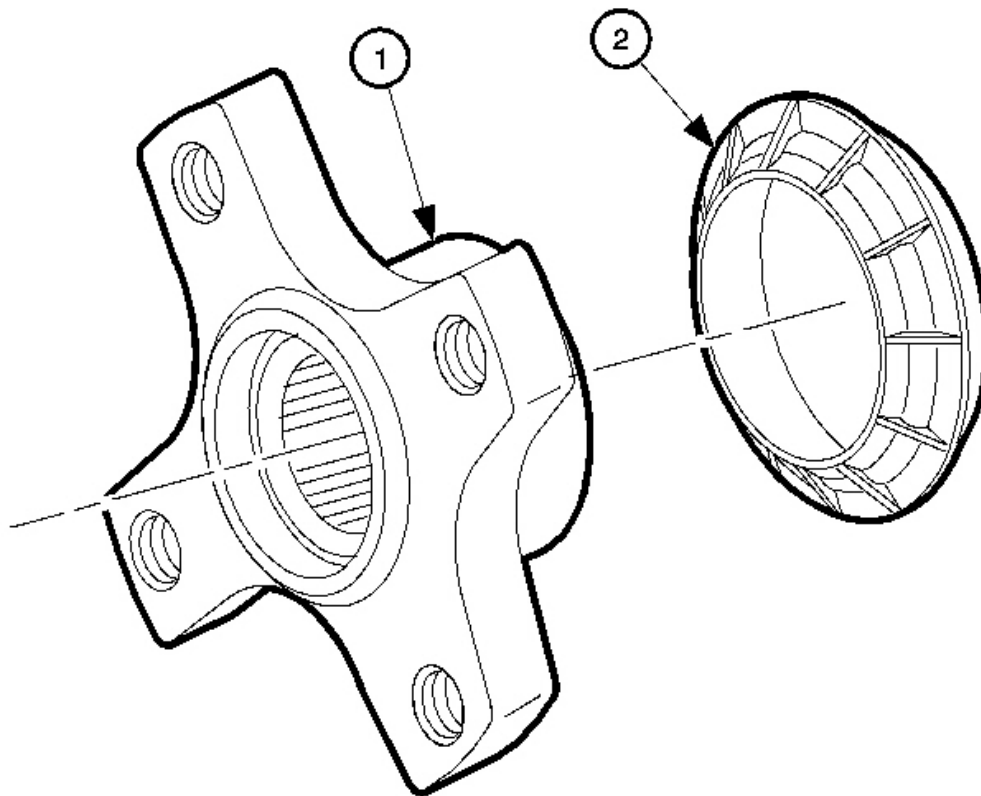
Removing/Installing Dust Deflector On The Drive Pinion Flange
